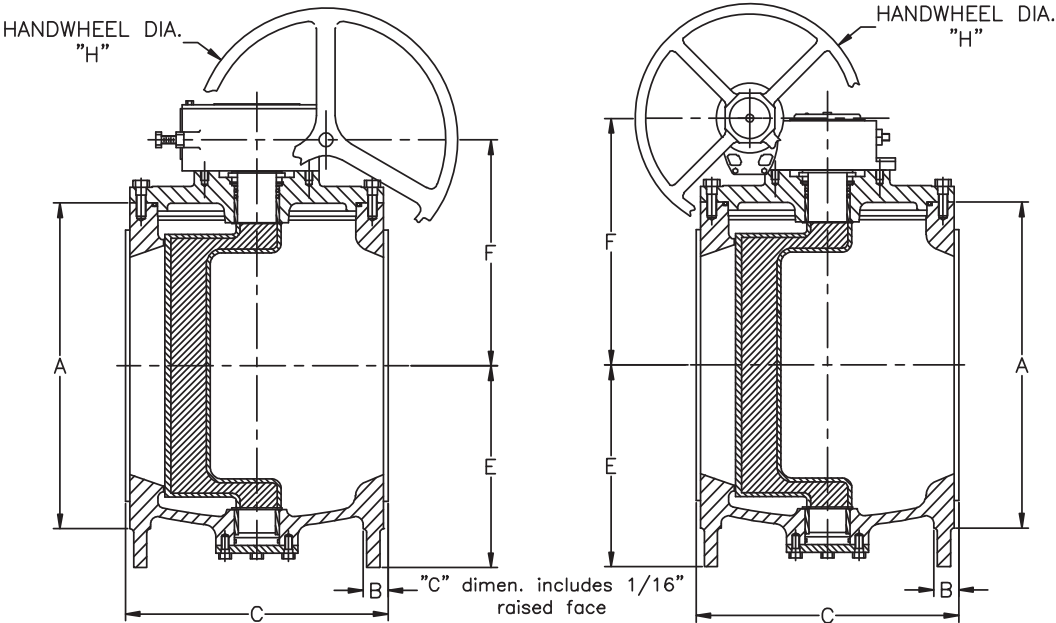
Class 250 Flanged End 2 1/2" – 12", 400 PSI, 14" – 36", 300 PSI
